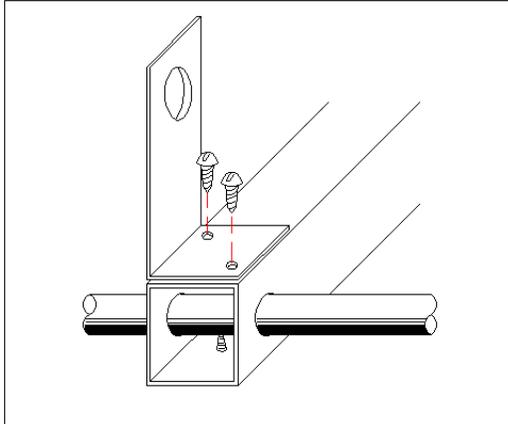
Fixing the feedpoint bracket on the mounting channel.
